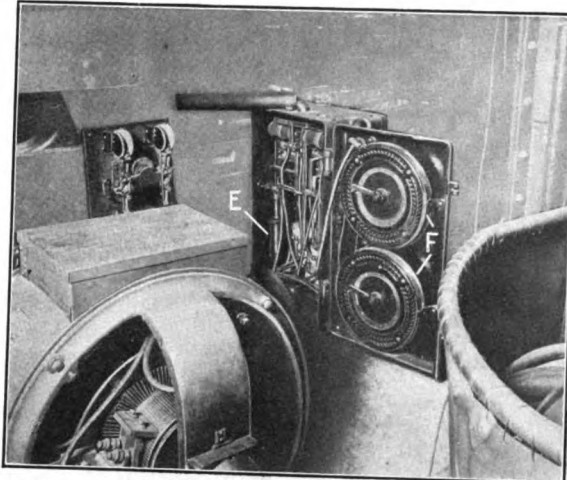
FRONT VIEW OF MAIN MECHANICAL PLANER CONTROLLER BOX
